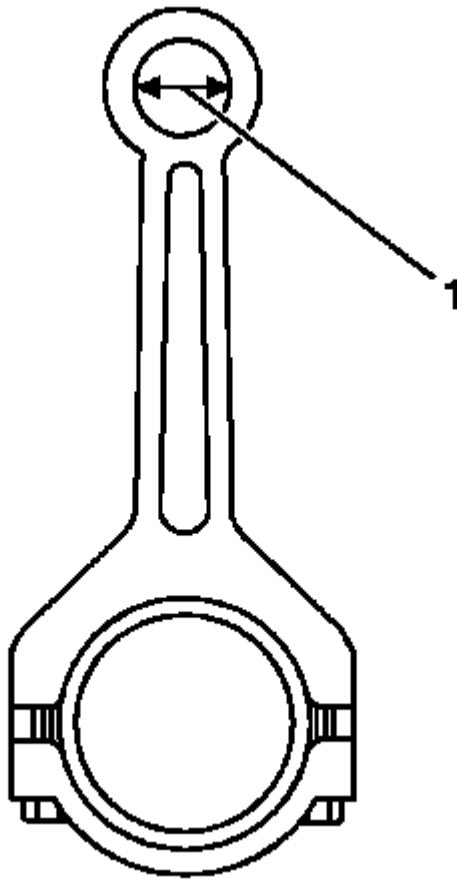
Measuring Connecting Rod Pin Bore Inside Diameter
